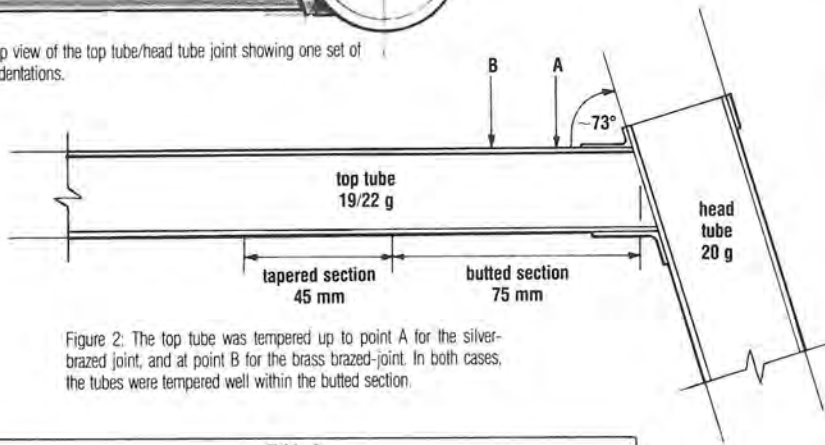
The top tube was tempered up to point A for the silver-brazed joint, and at point B for the brass brazed-joint. In both cases, the tubes were tempered well within the butted section.
